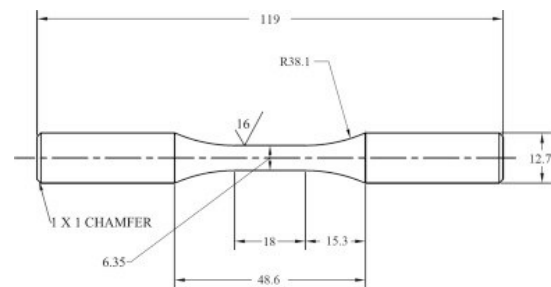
Dimensions in mm of rotating bending fatigue samples [21]
